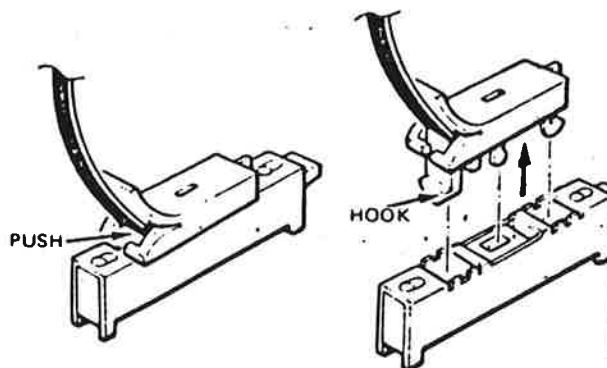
ONE BUTTON COLOR REMOTE CABLE REMOVAL
